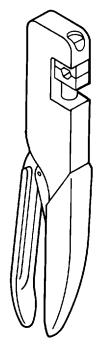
Crimp Tool M22520/5-01 and M22520/10-01
